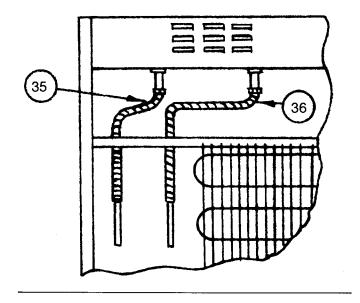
FAUCET PLUMBING CONNECTIONS IRON PIPE
